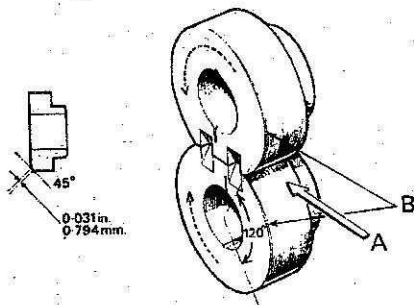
When installing new bearings in worn pump, inlet (A) side of inner bearings should be chamfered at (B) as shown in inset.
